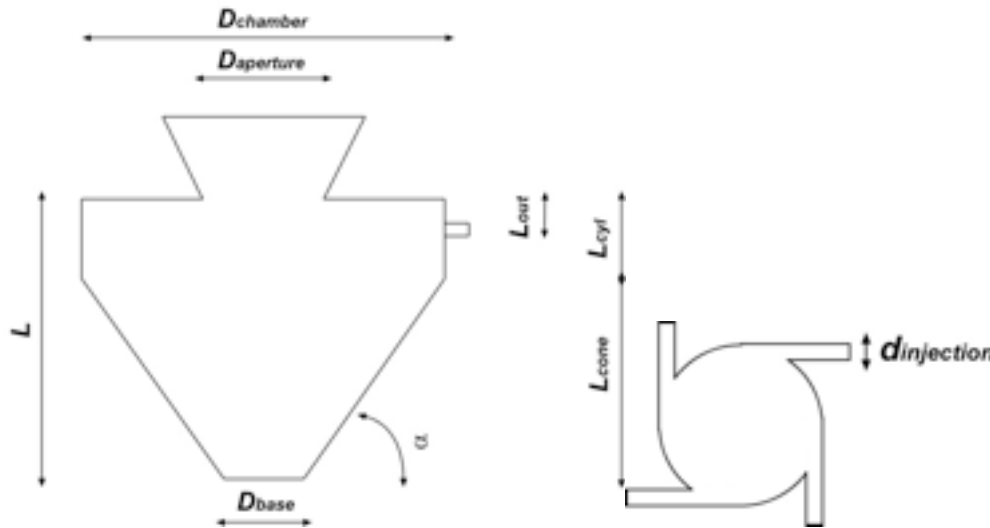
Proposed geometry frontal view (left) and top view (right)
